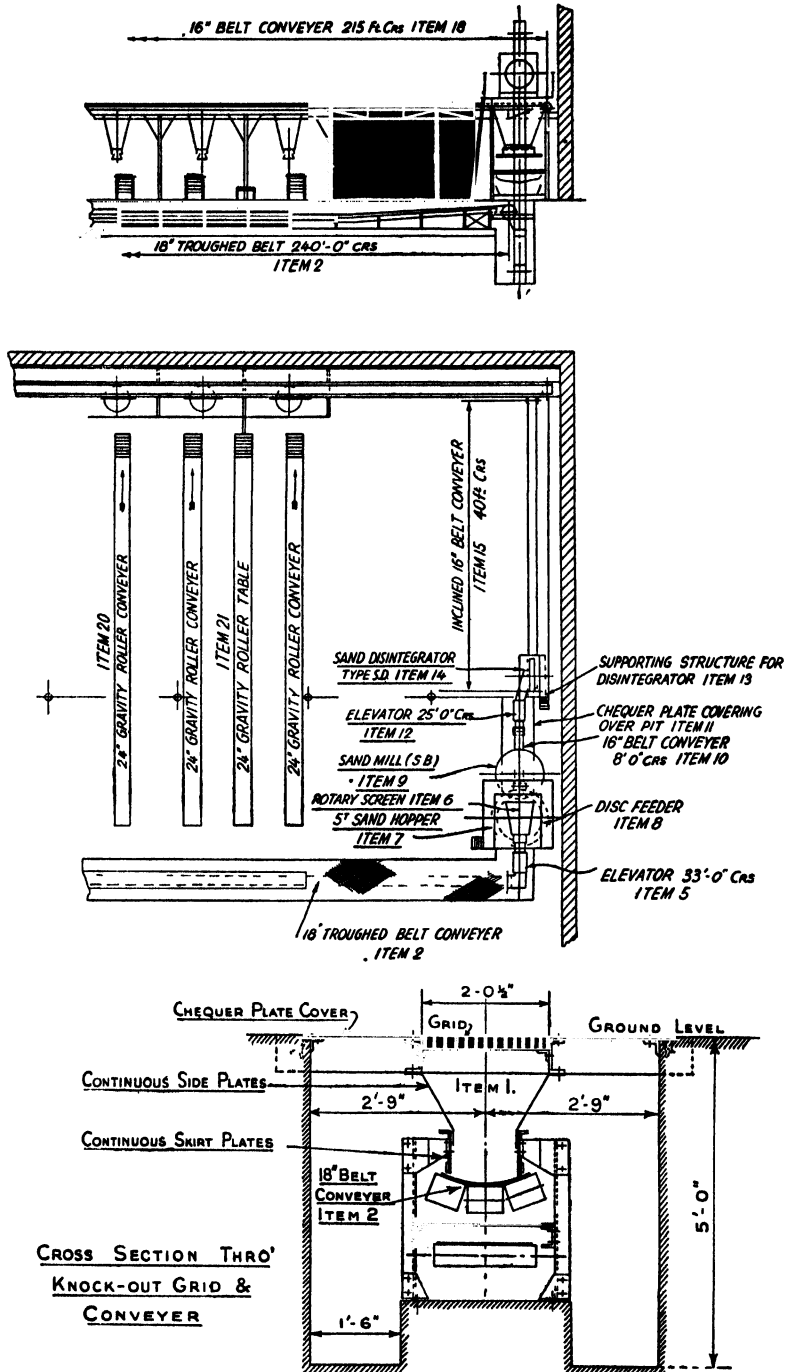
SUGGESTED LAYOUT FOR MECHANIZED FOUNDRY
